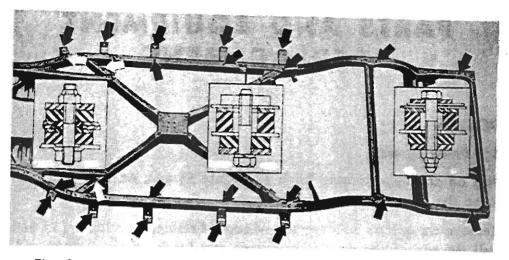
Body Mounting Bolt Locations. Inset Showing Crosssection of Typical Body Bolt and Cushion.
